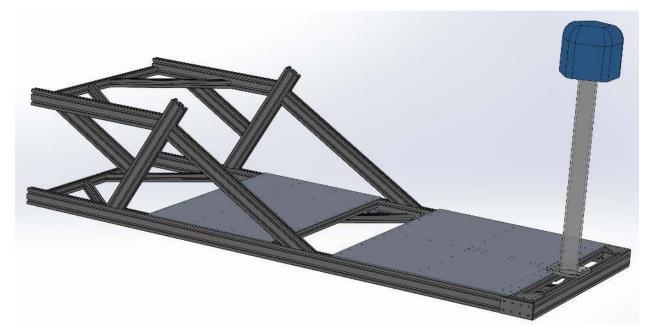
CAD model of the standing platform with Ladybug 5+ camera mount and cover
